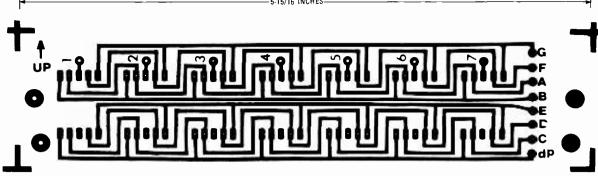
USE THIS FULL-SIZE PATTERN to etch the display board of the deluxe panel counter.
